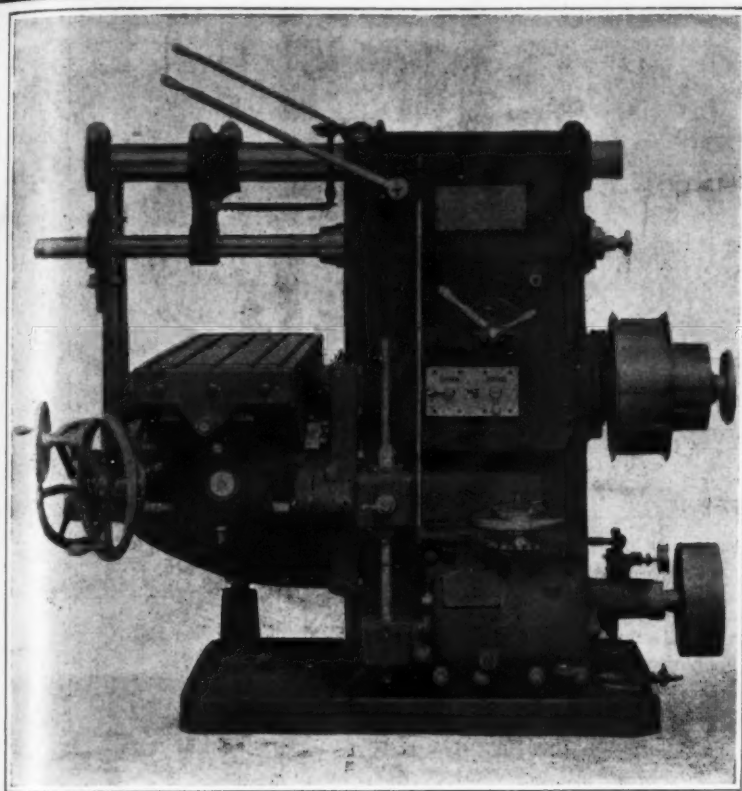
Pillar-and-knee Horizontal Spindle Milling-machine.
